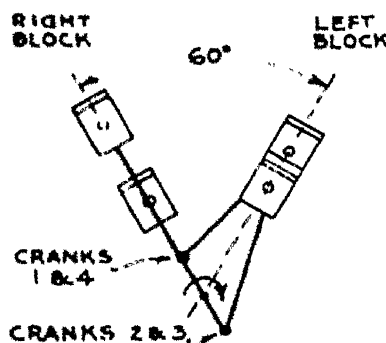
Front view of crankshaft and connecting rod arrangement for 60 deg. V-type engine showing pistons Nos. 1 and 4 in right block on top dead center position.
